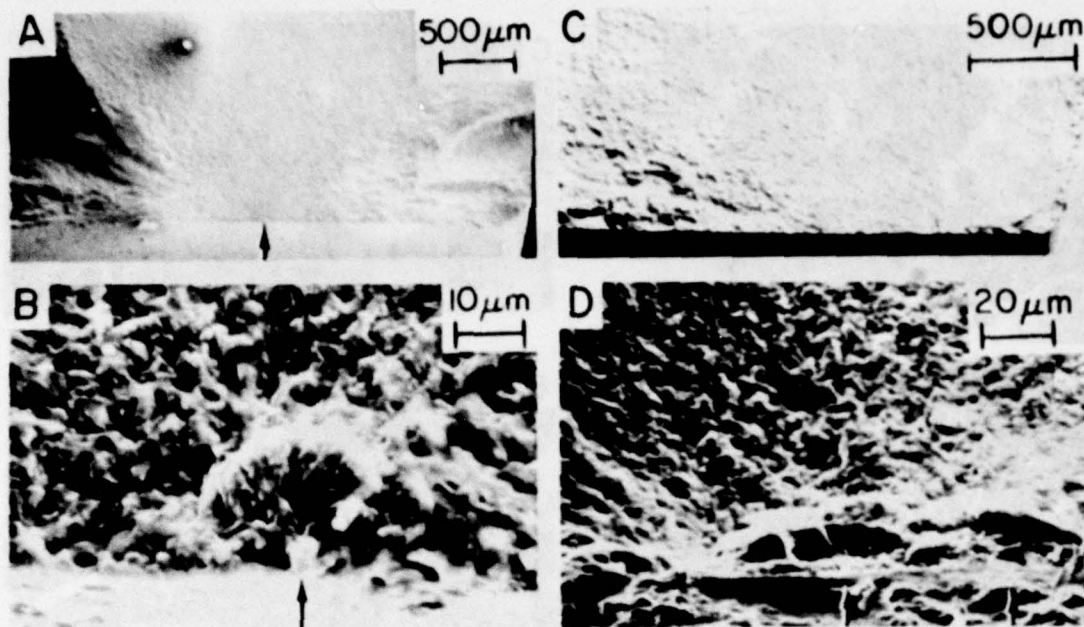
Example of machining flaws at fracture origins in a fine grain ceramic machined parallel and perpendicular to the tensile axis of the bar. A and B represent lower and higher magnification of the fracture origin of a dense, fine grain mullite bar machined parallel with the tensile axis; fracture stress  $\sim 325$  MPa (47,000 psi). Note the nearly semicircular, i.e. half-penny shape of the flaw periphery, but that the flaw has some curvature to it, e.g. its shape is similar to half a clam shell. Figure C and D show fracture surfaces and the fracture origin of a test bar of the same material ground perpendicular to the tensile axis; fracture stress  $\sim 207$  MPa (30,000 psi). Note some difference in depth of the flaws in A-D, the more elongated character of that in C and D, and the fact that the latter consists of at least two partially overlapping segments.
